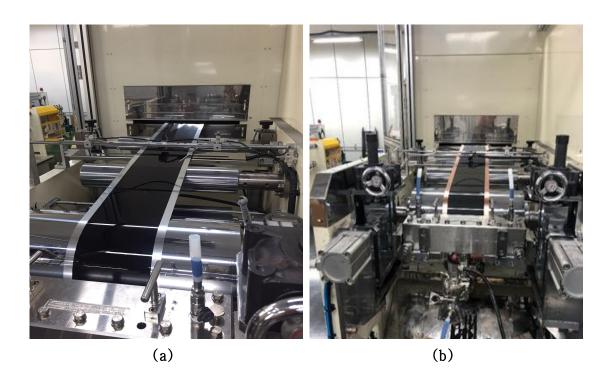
Coating process; (a) cathode coating (b) anode coating
